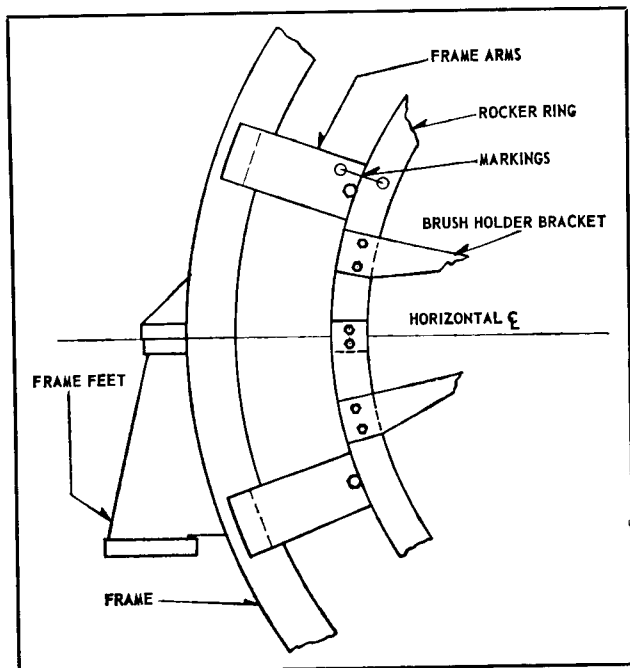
Locating Brush Position by Rocker-Ring and Frame Arm Markings on Standard D-C Generators and Motors
